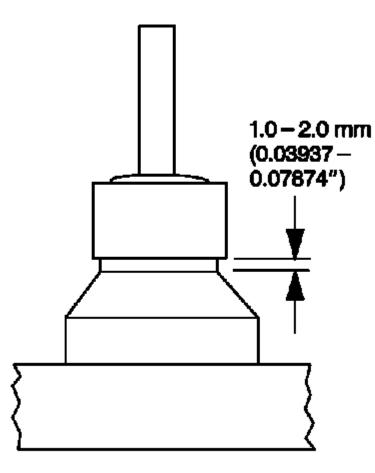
Positioning Valve Stem Oil Seal Into Valve Guide Courtesy of GENERAL MOTORS CORP.
